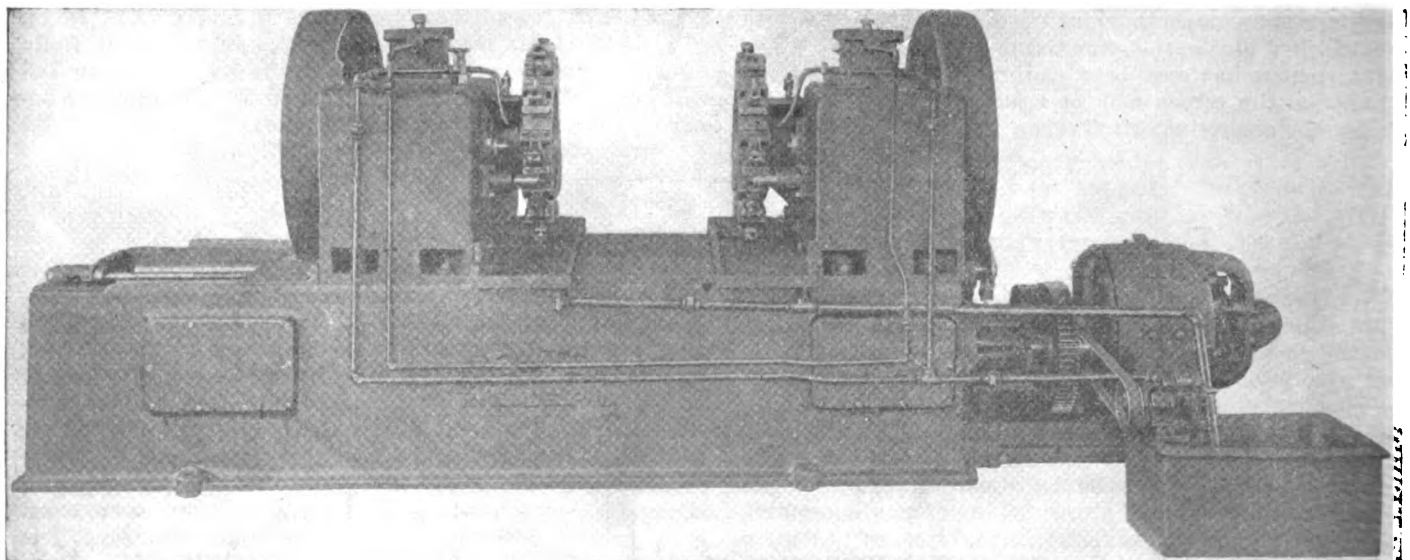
Newton continuous milling machine for facing ends of shafts, etc.
